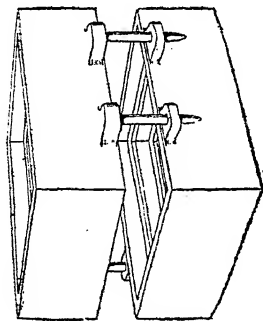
A pair of moulding boxes, showing locating dowels.
